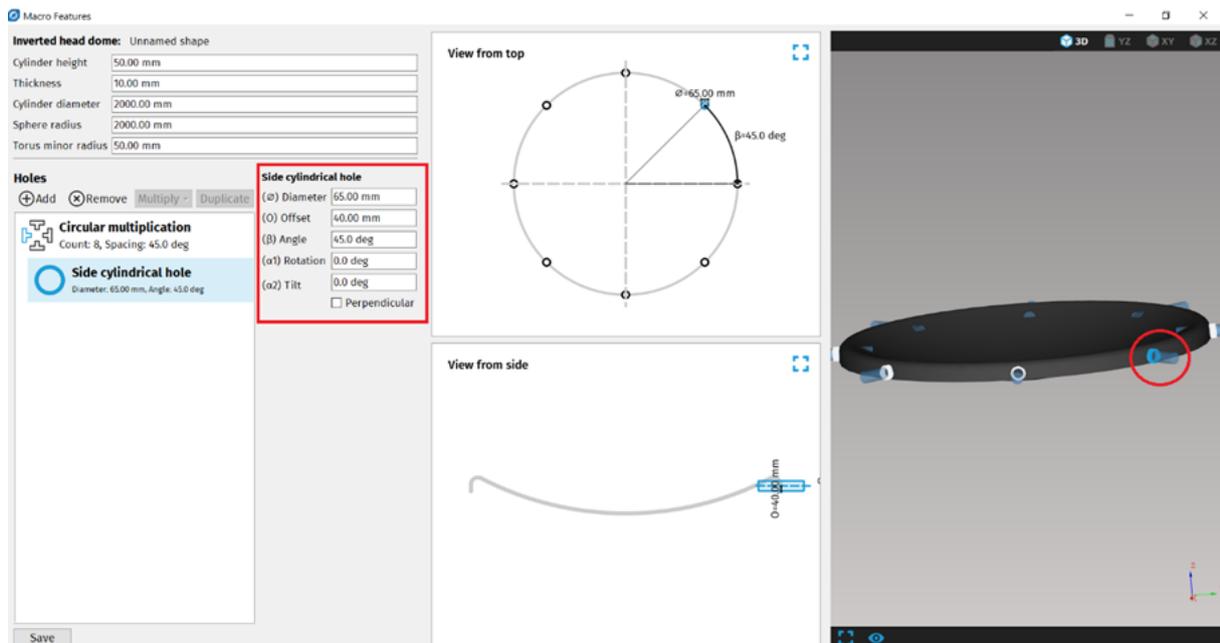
Example of Side cylindrical hole macro placed on Inverted head dome
